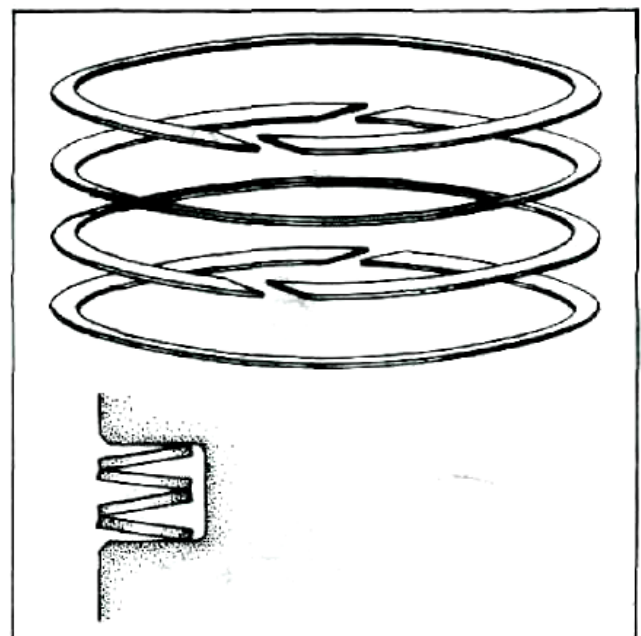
Laminated Ring Arrangement on L4 Piston.
